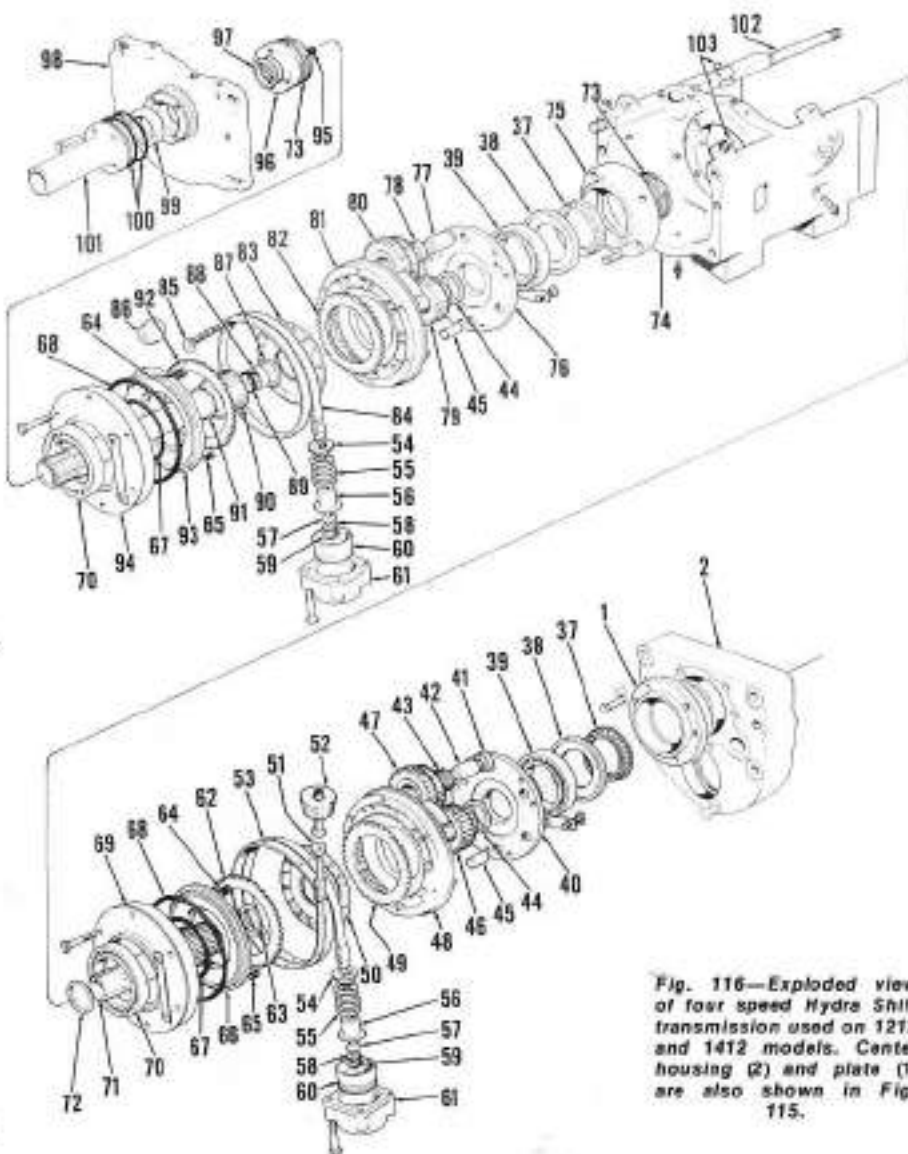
Exploded view of four speed Hydra Shift transmission used on 1212 and 1412 models. Center housing (2) and plate (1) are also shown in Fig. 115.
